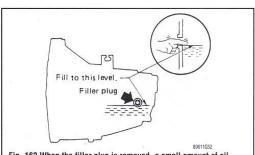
When the filler plug is removed, a small amount of oil should run out; this indicates a correct fluid level
